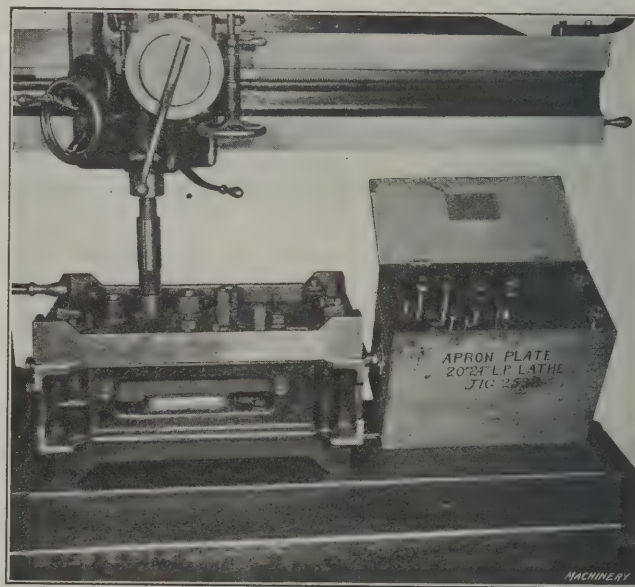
Tool Equipment for Drilling and Boring Lathe Aprons
